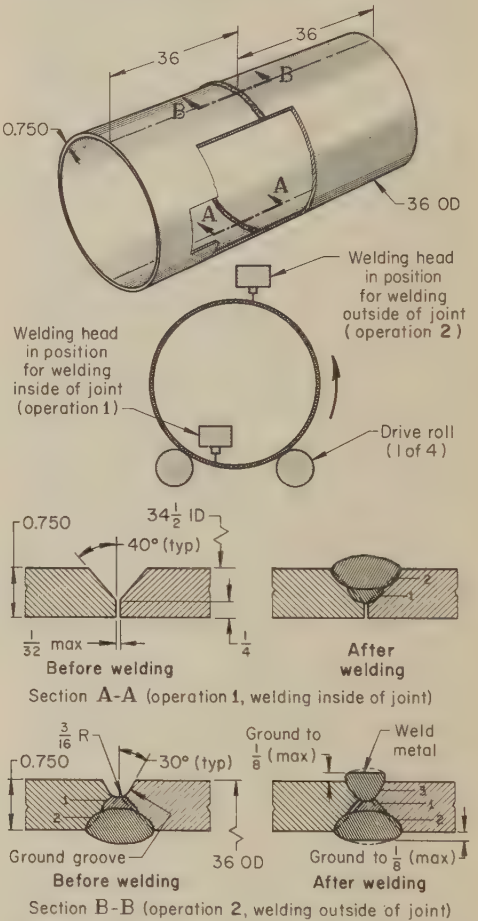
Joining of two rotated cylinders by deposition of inside, then outside, circumferential weld beads, using a welding head that was supported and guided by a boom (Example 51)
